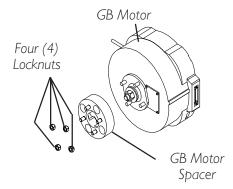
REMOVING/ INSTALLING GB MOTOR SPACER
